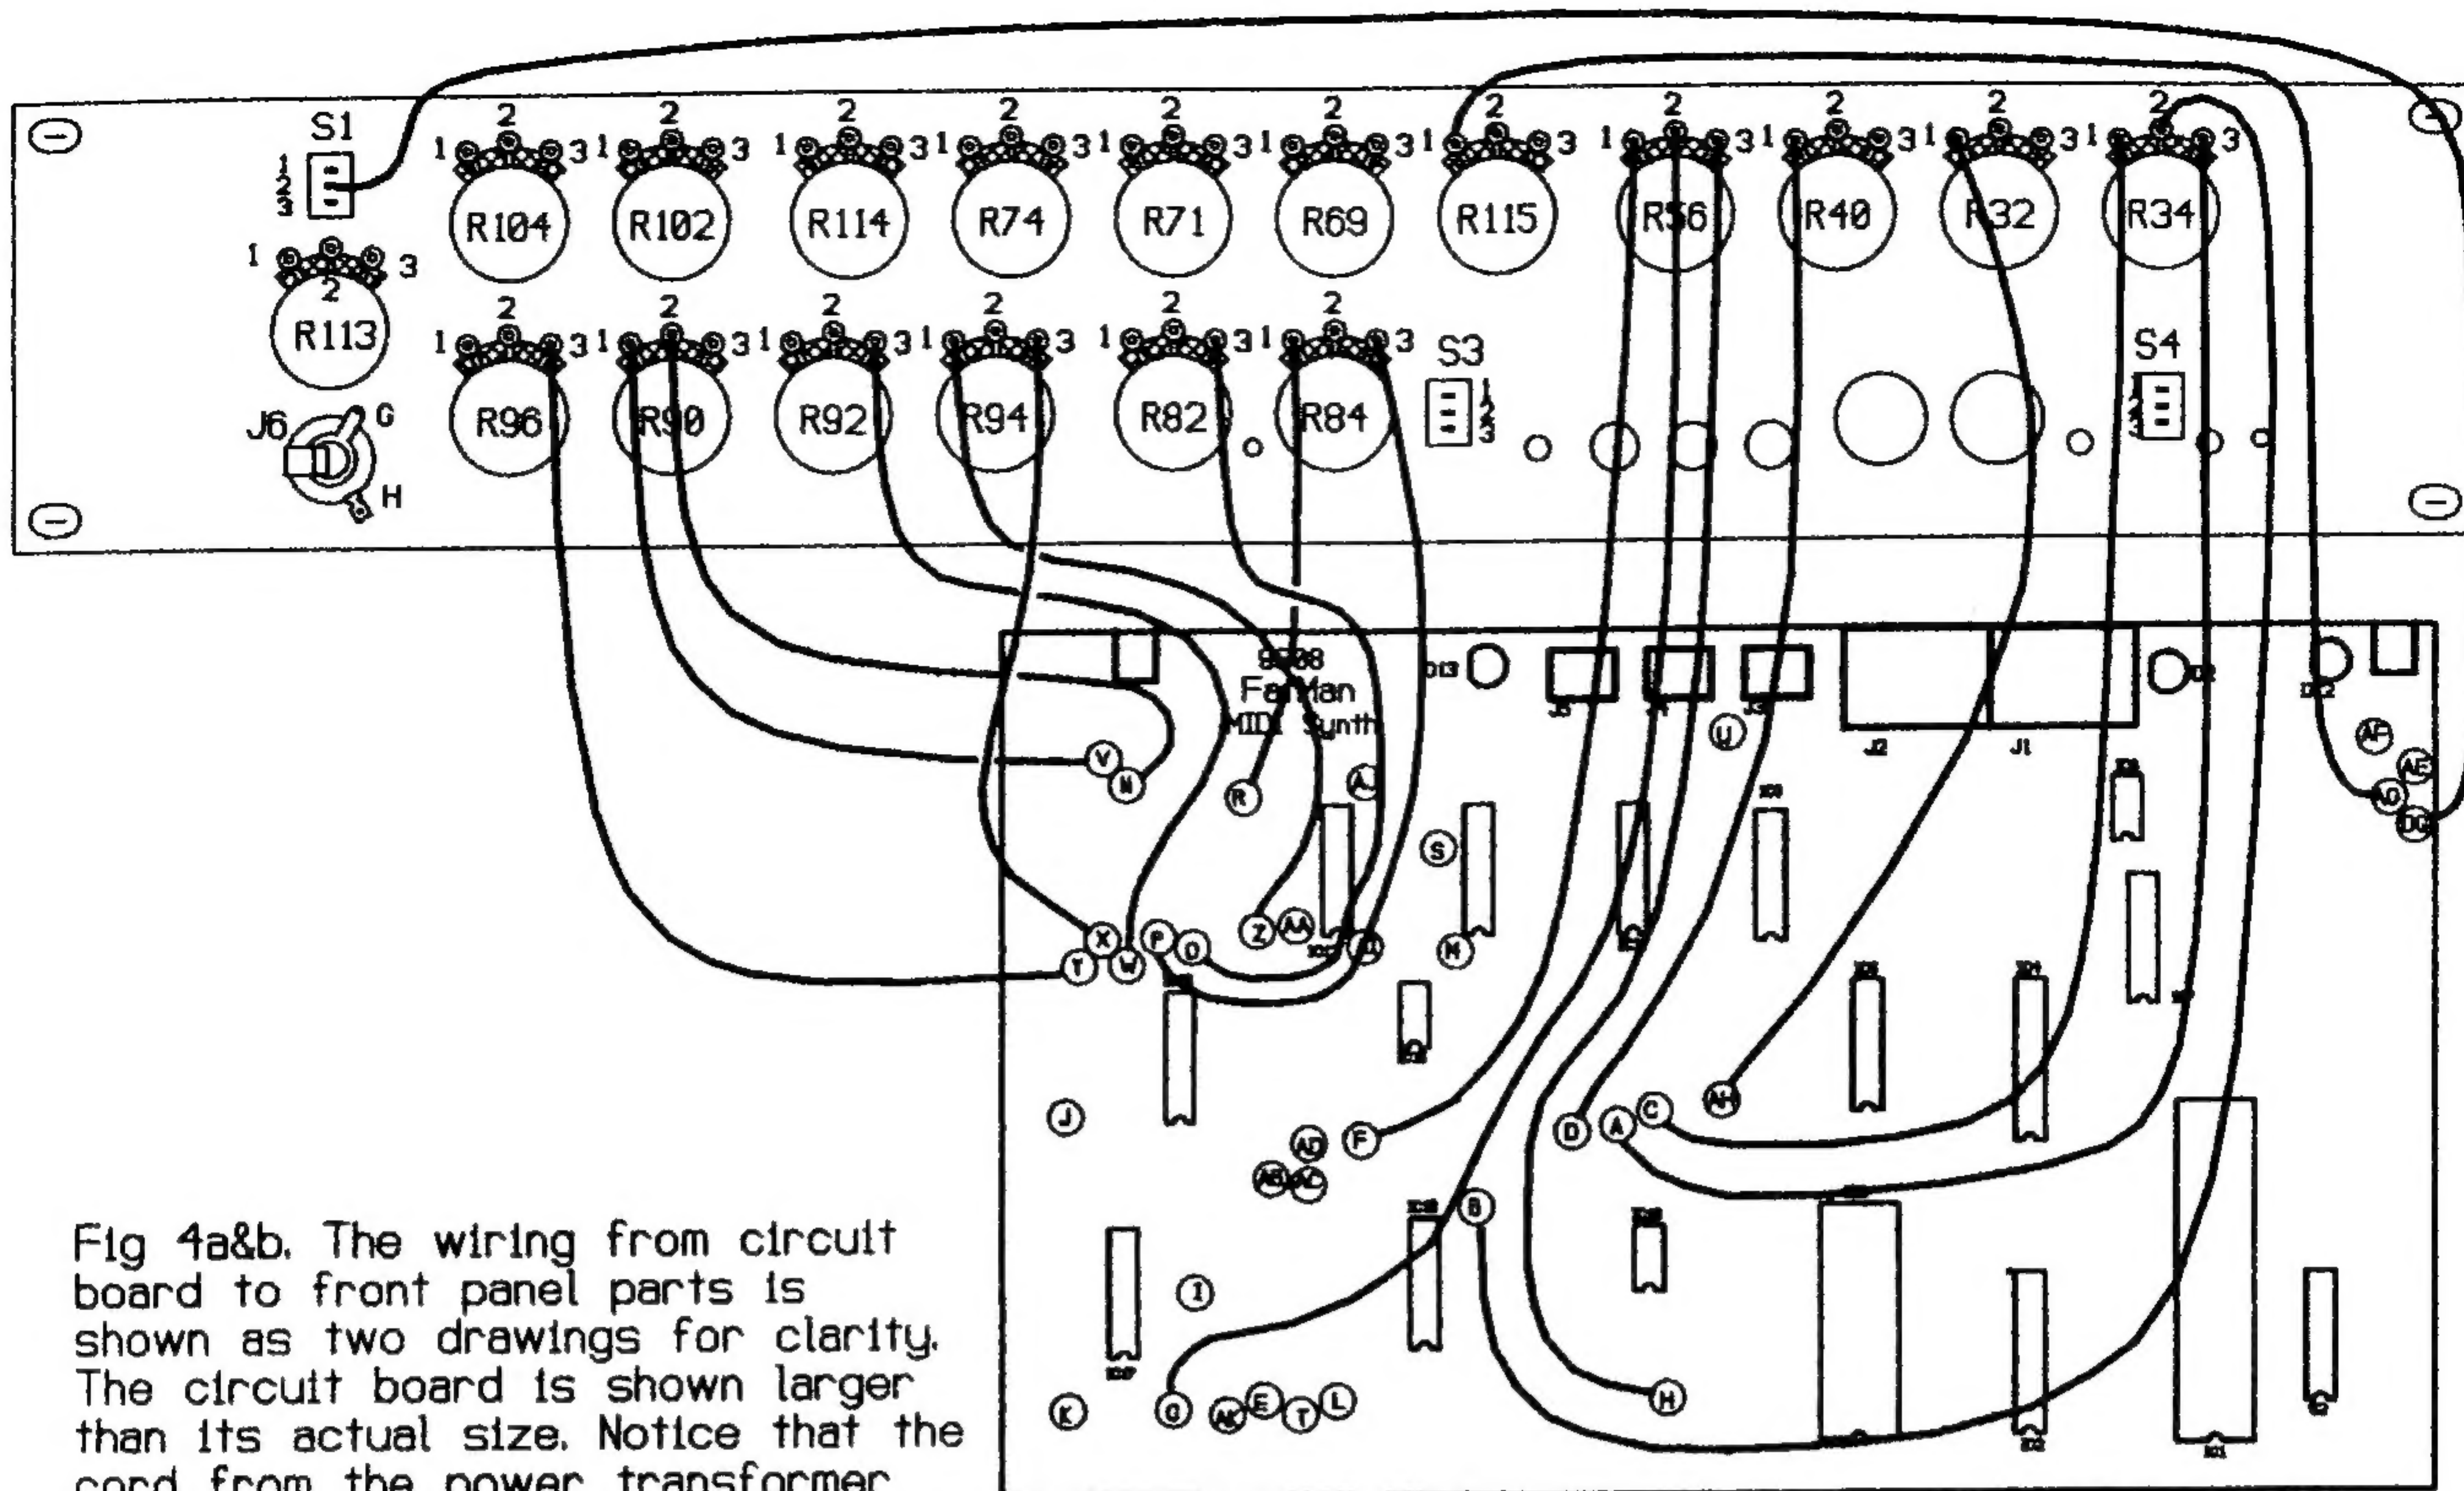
&b. The wiring from circuit board to front panel parts is shown as two drawings for clarity. The circuit board is shown larger than its actual size. Notice that the cord from the power transformer passes through the nylon cable clamp and is knotted for strain relief.
